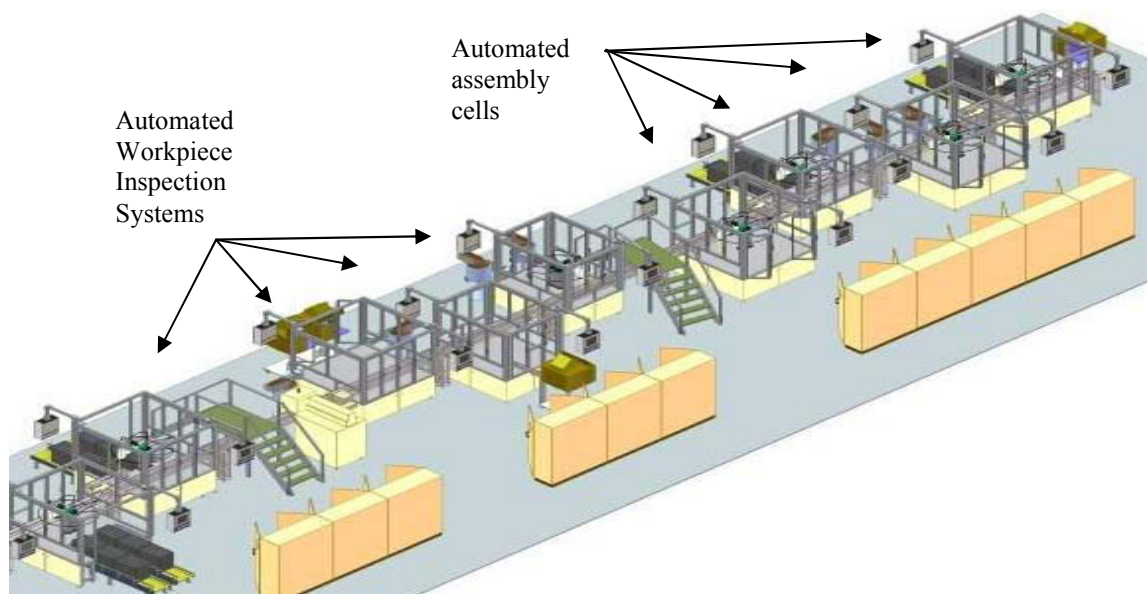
Automated Assembly and Workpiece Inspection System (AAWIS)
